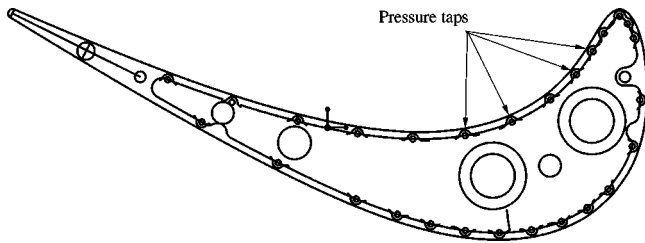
Part drawing of tip surface of hollow blade with location of pressure taps
